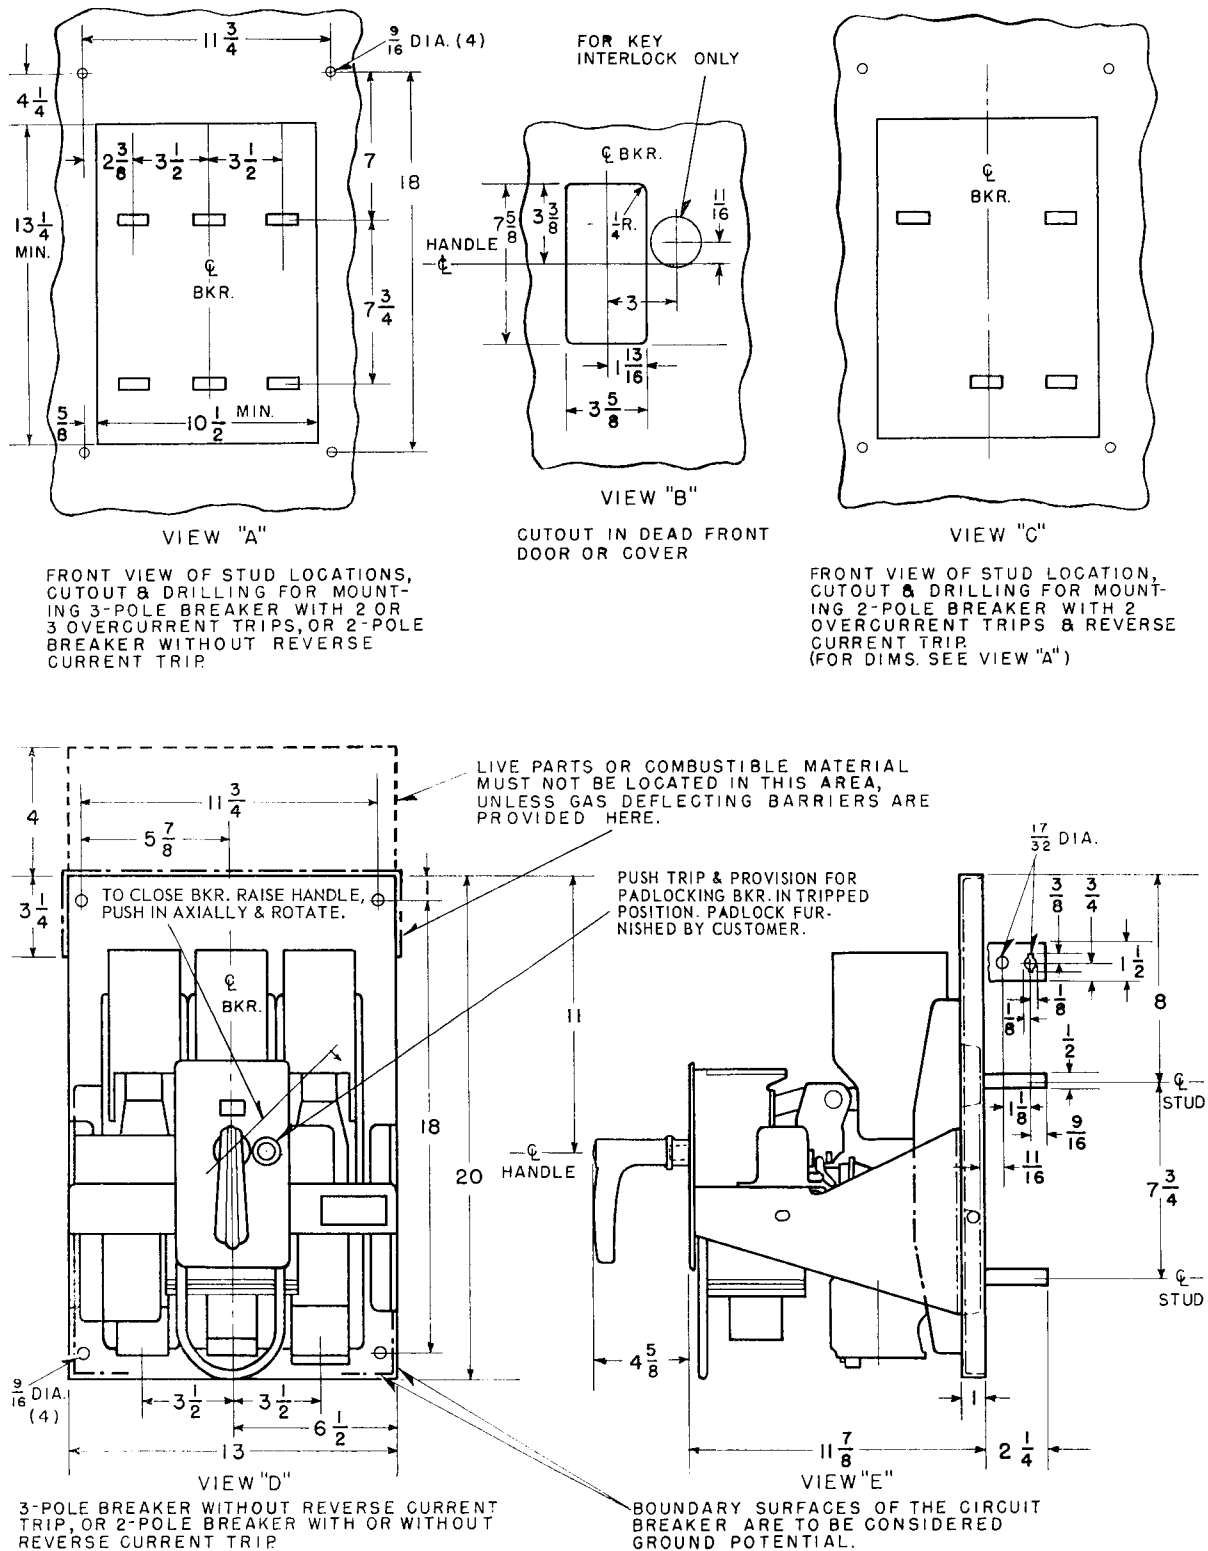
DB-25 Outline Dimensions and Mounting Details
